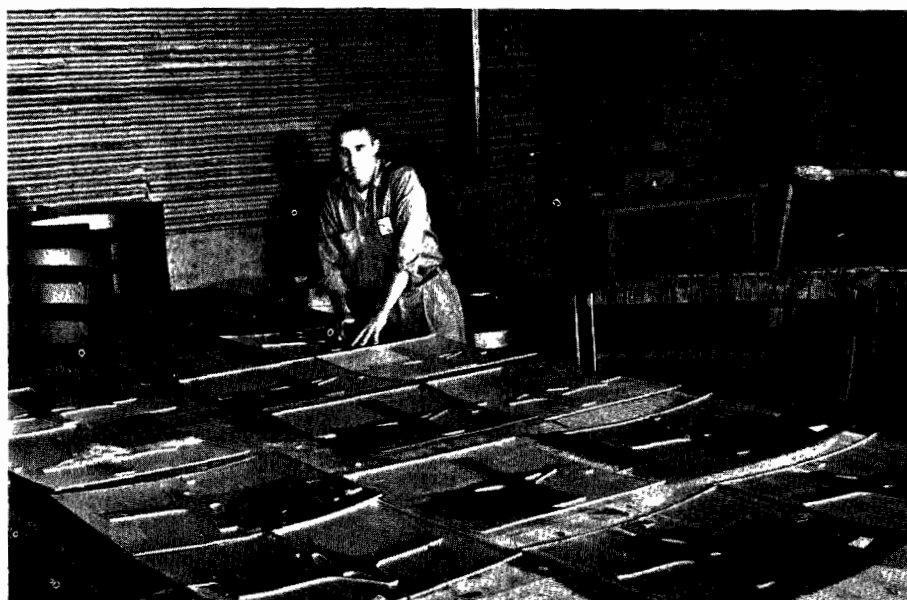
Masking being stripped, milled parts with masking still in place, and milled parts with masking removed (U.S. Chemical Milling Corporation, Manhattan Beach, Calif.).
